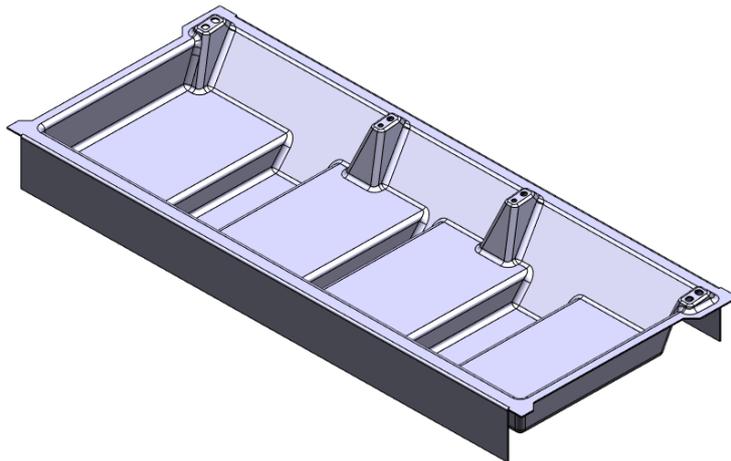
Initial HFQ concept revision 3: Tub- and tubsupport walls merged into one continuous wall to reduce geometrical complexity.
